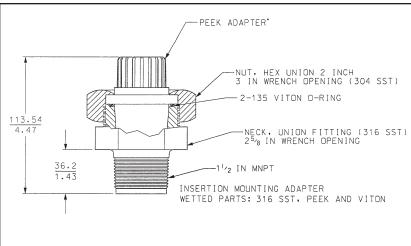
Insertion Mounting Adapter (PN 23242-02, -03)
